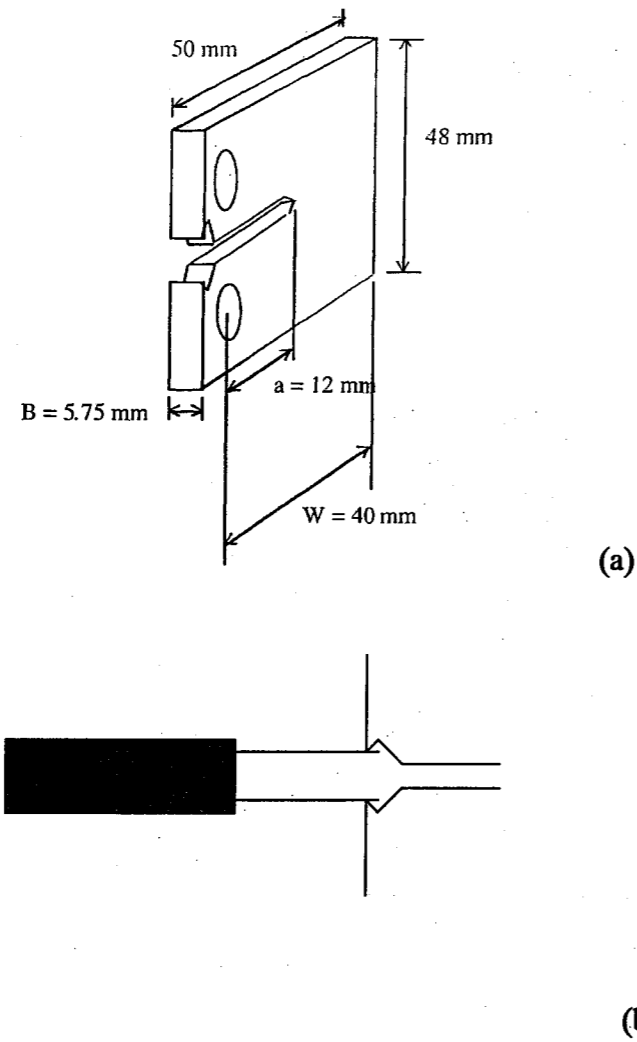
(a) CT specimen dimensions (b) Crack opening displacement (COD) gauge.
